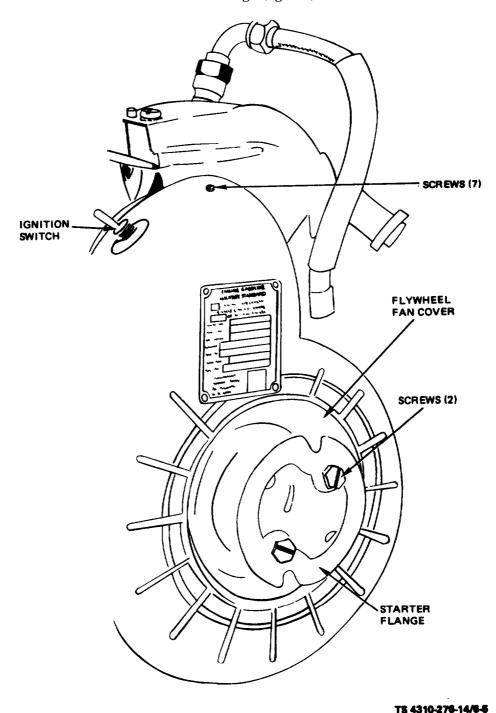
Starter Flange and Flywheel Fan Cover, Removal and Installation
